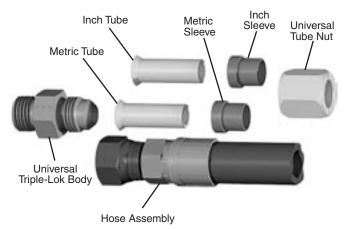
Triple-Lok's Adaptability to Inch Tube, Metric Tube, or Hose Assemblies
